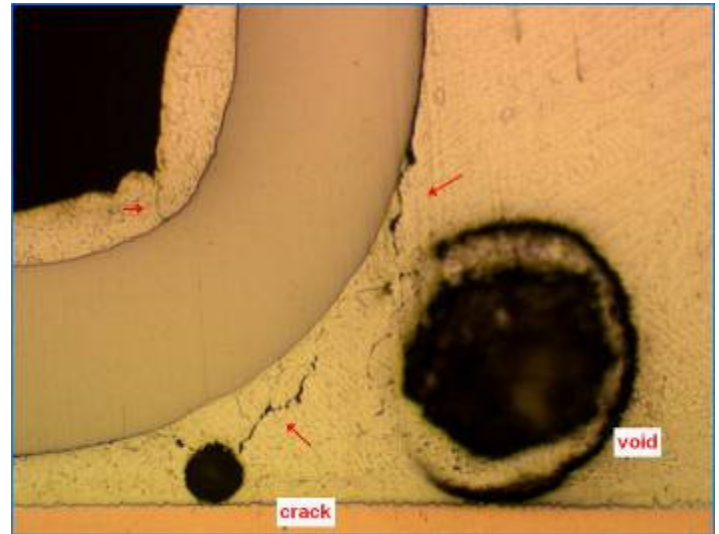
cross section, SN62, U61, left lead solder crack and voids, 200x
